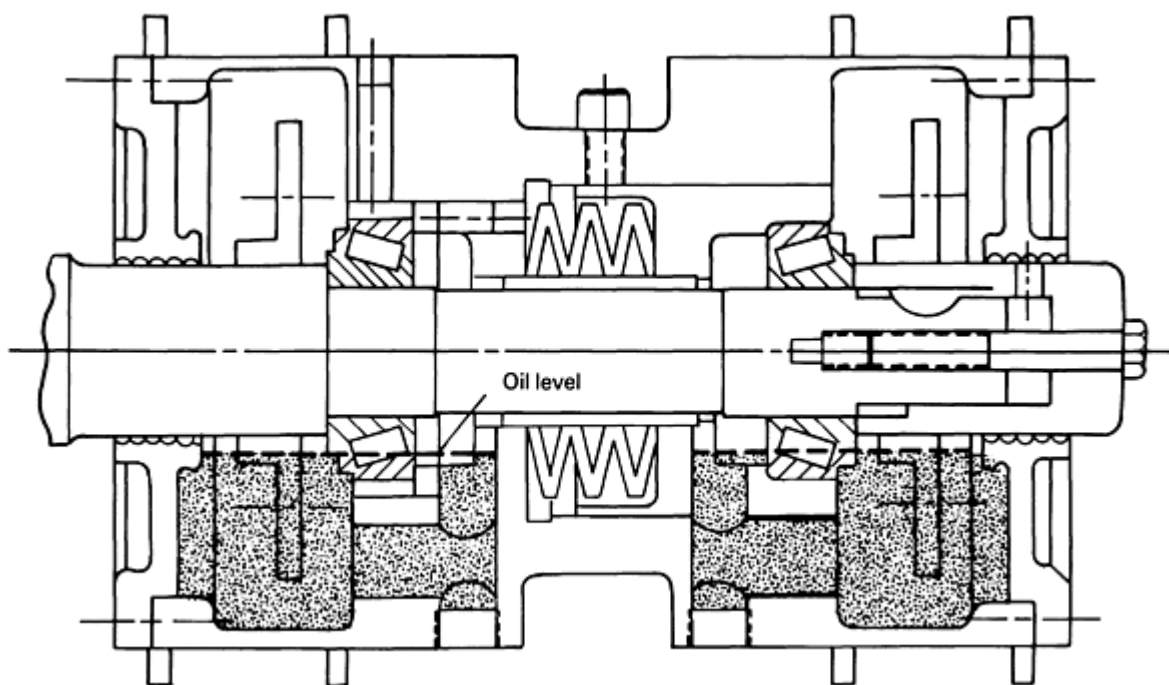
Schematic showing cross-sectional view of a two-chamber bearing wear machine
